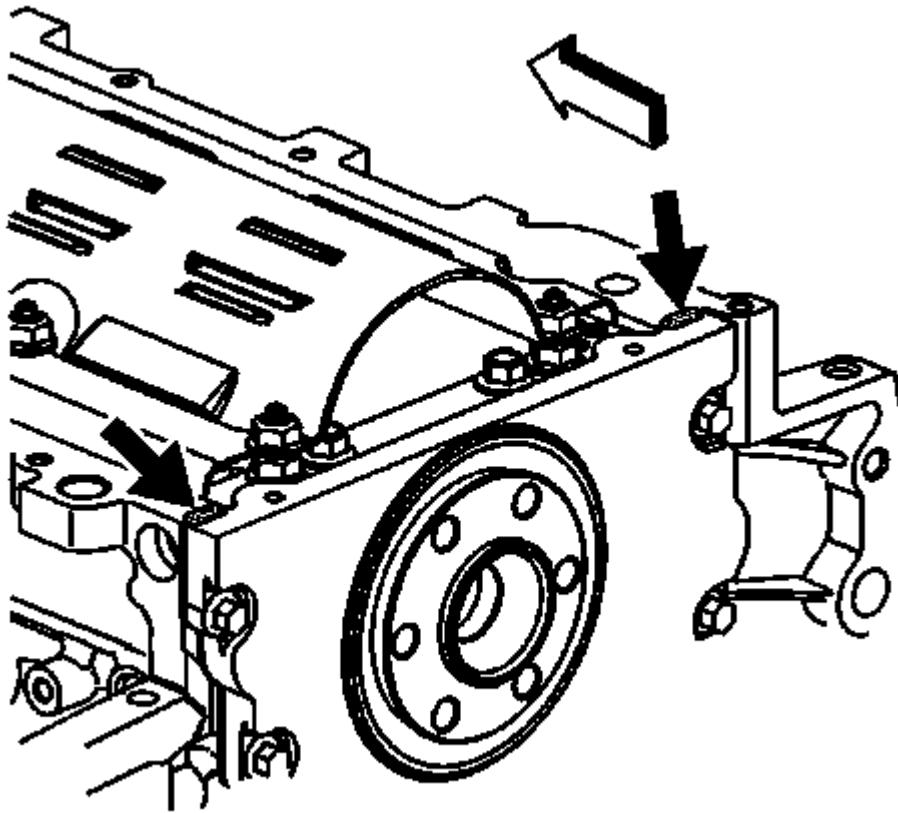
View Of Sealant On Engine Rear Cover Gasket Tabs
